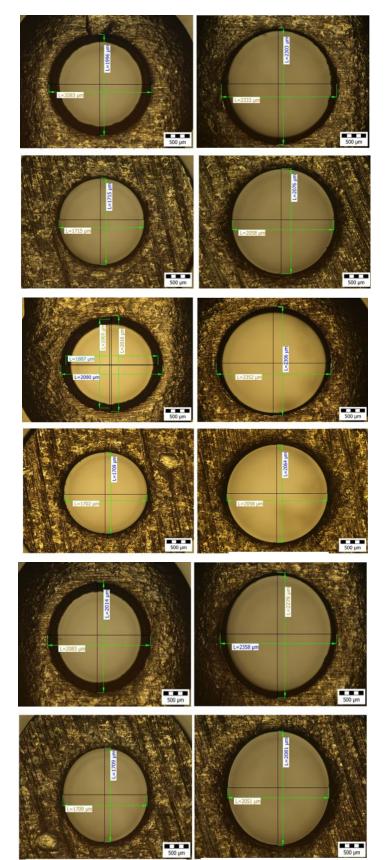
Dimensional stability of a sheared-out component from 1000 to 8000 pieces
